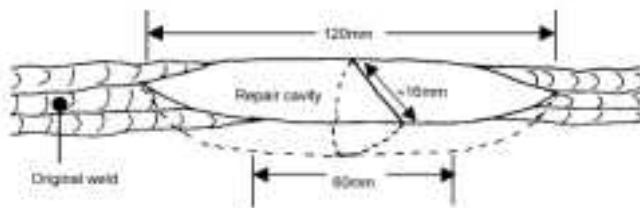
Sketch showing geometry of repair weld cavity
